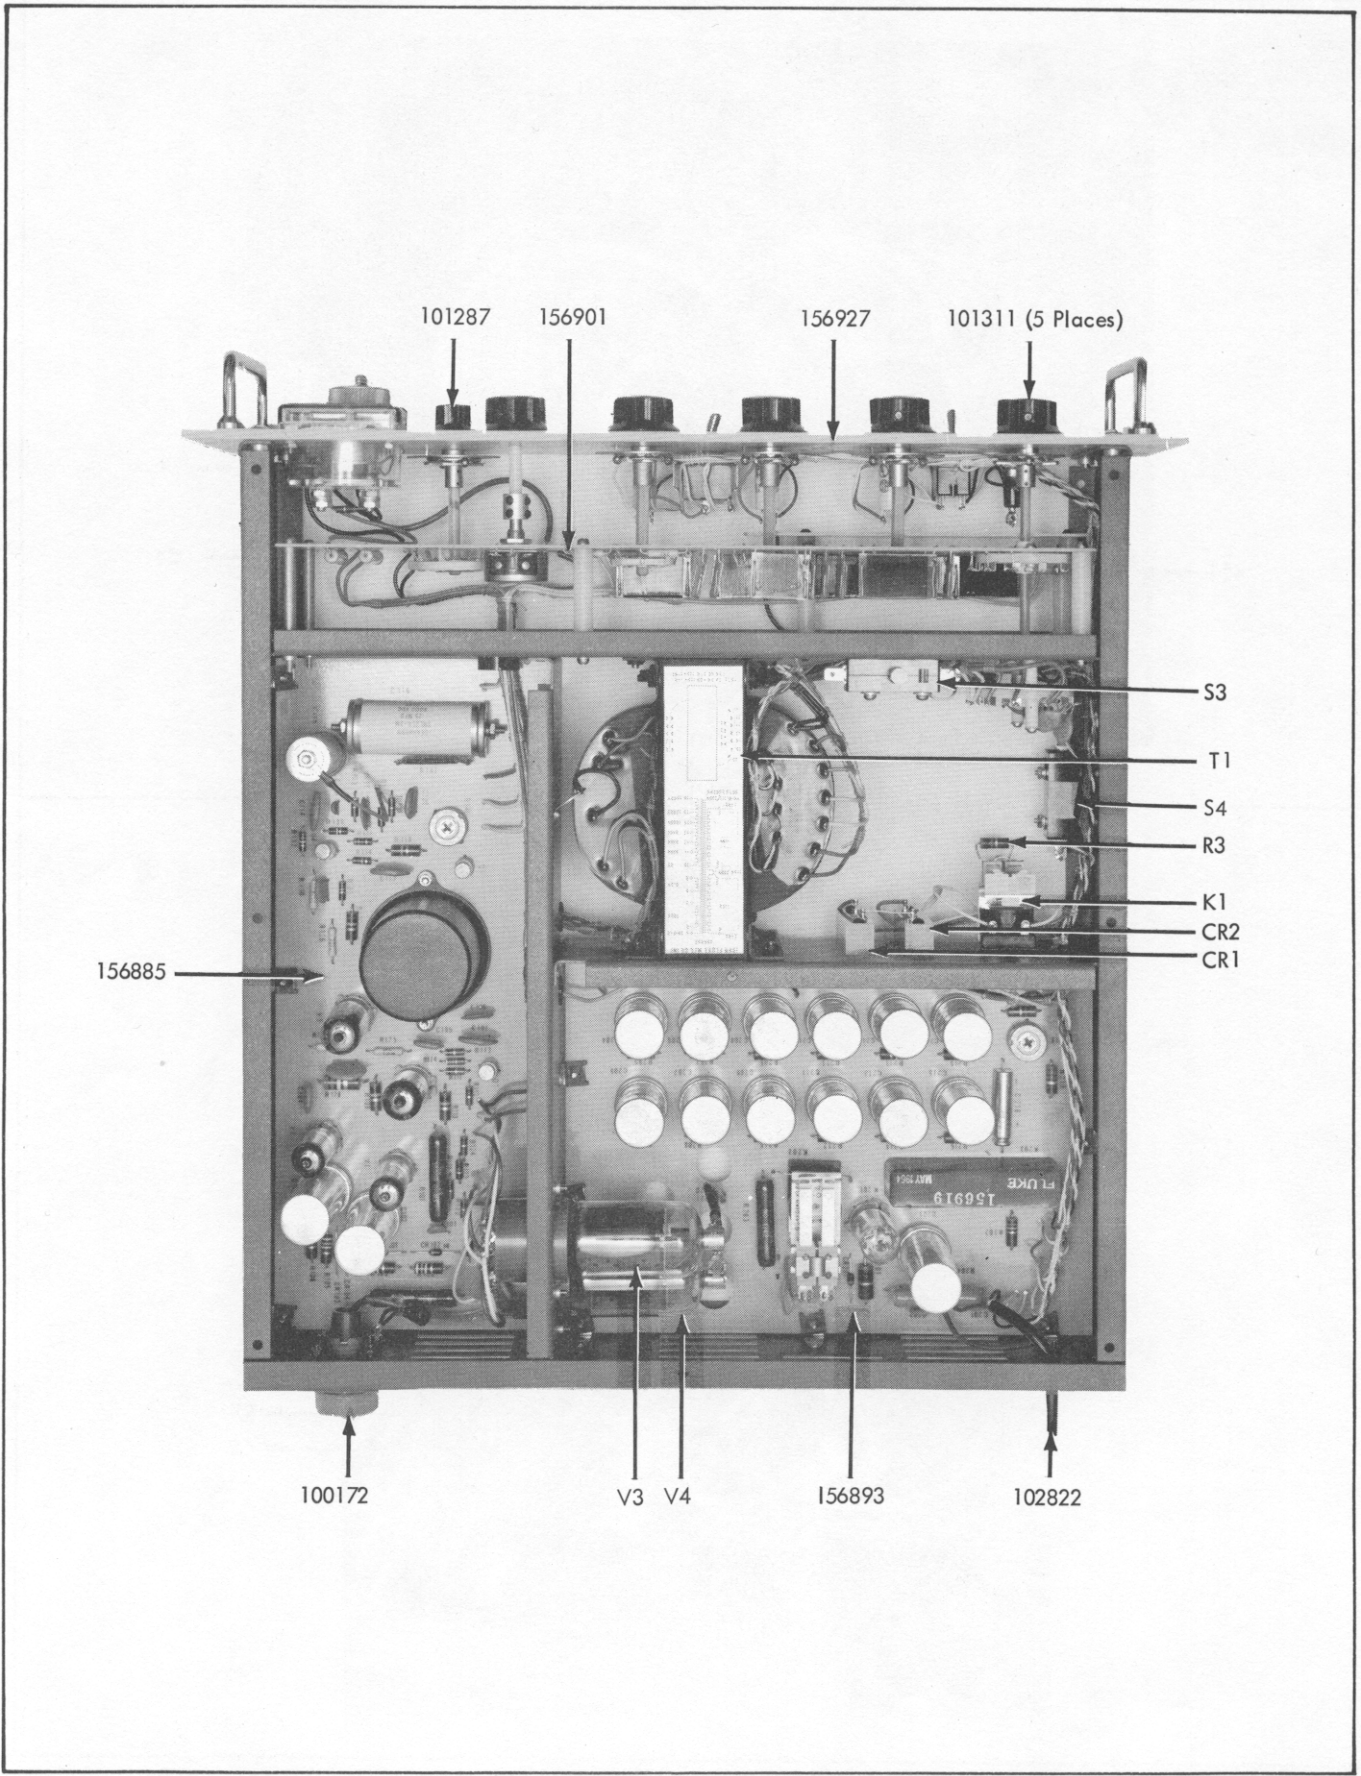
FINAL ASSEMBLY (sheet 1 of 2)
